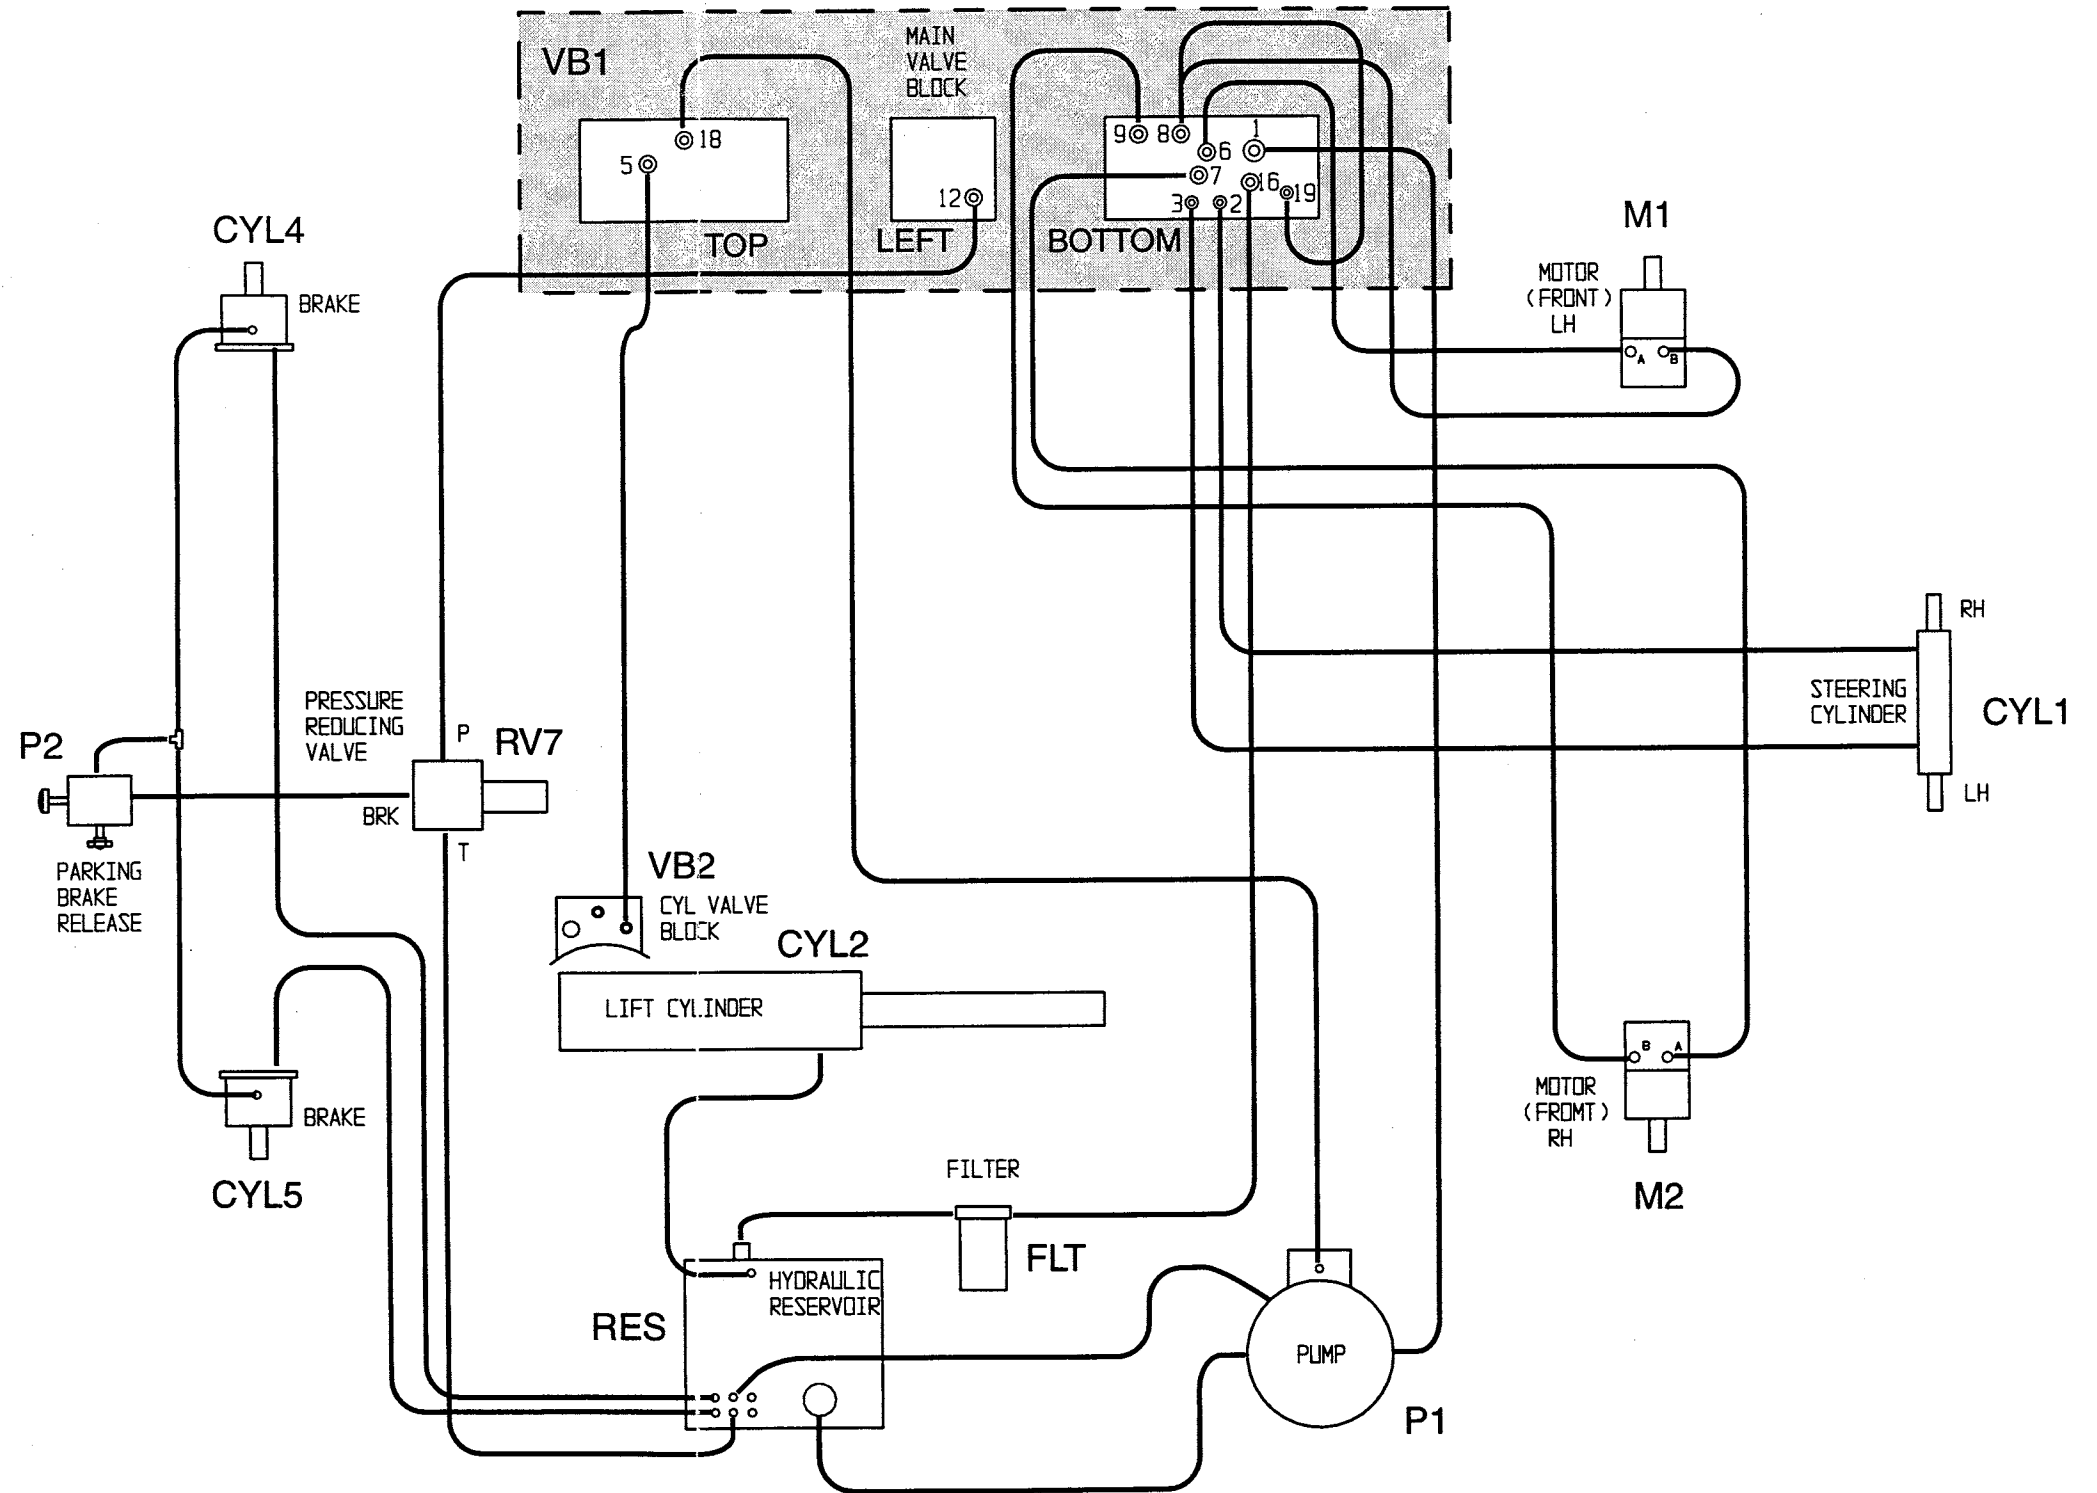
Hose Routing, XRT27 2-Wheel Drive
